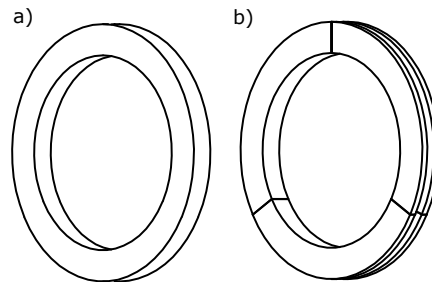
Typical designs of backup rings: a) uncut backup ring, b) three piece radial cut backup ring [3].
